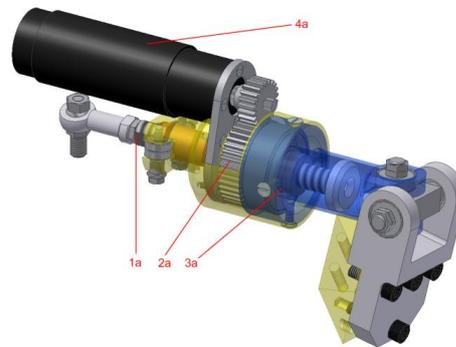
Bodies of the linear actuator (by Houška, P.)
